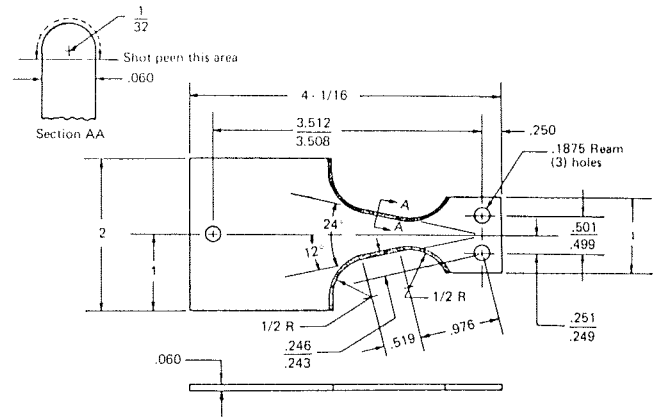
High cycle fatigue specimen. Grinding and milling.
